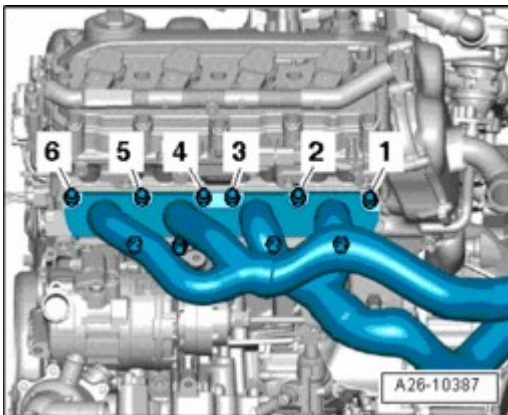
Removing/Installing Nuts And Left Exhaust Manifold
